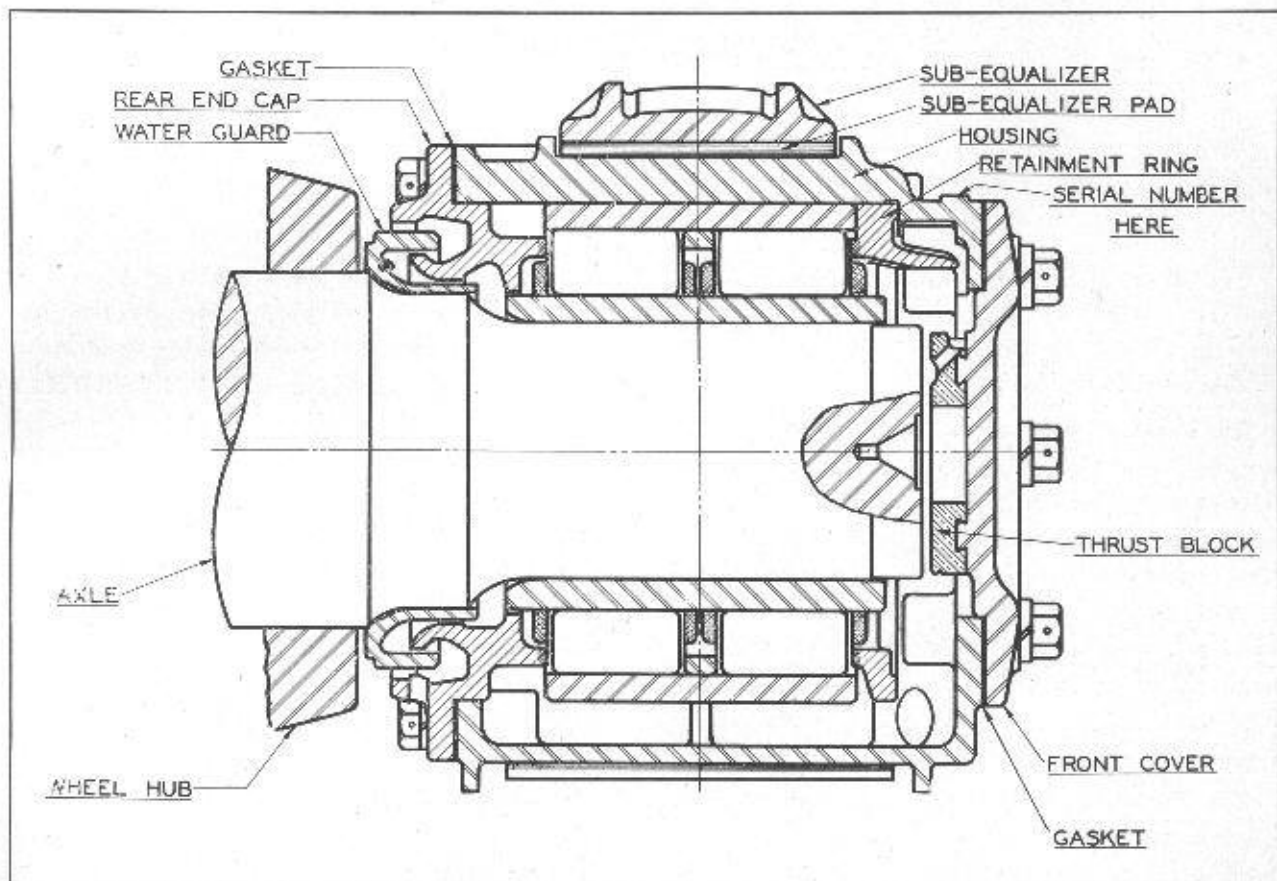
Cross section of the type JM Hyatt Roller Bearing Journal Box (plain).
